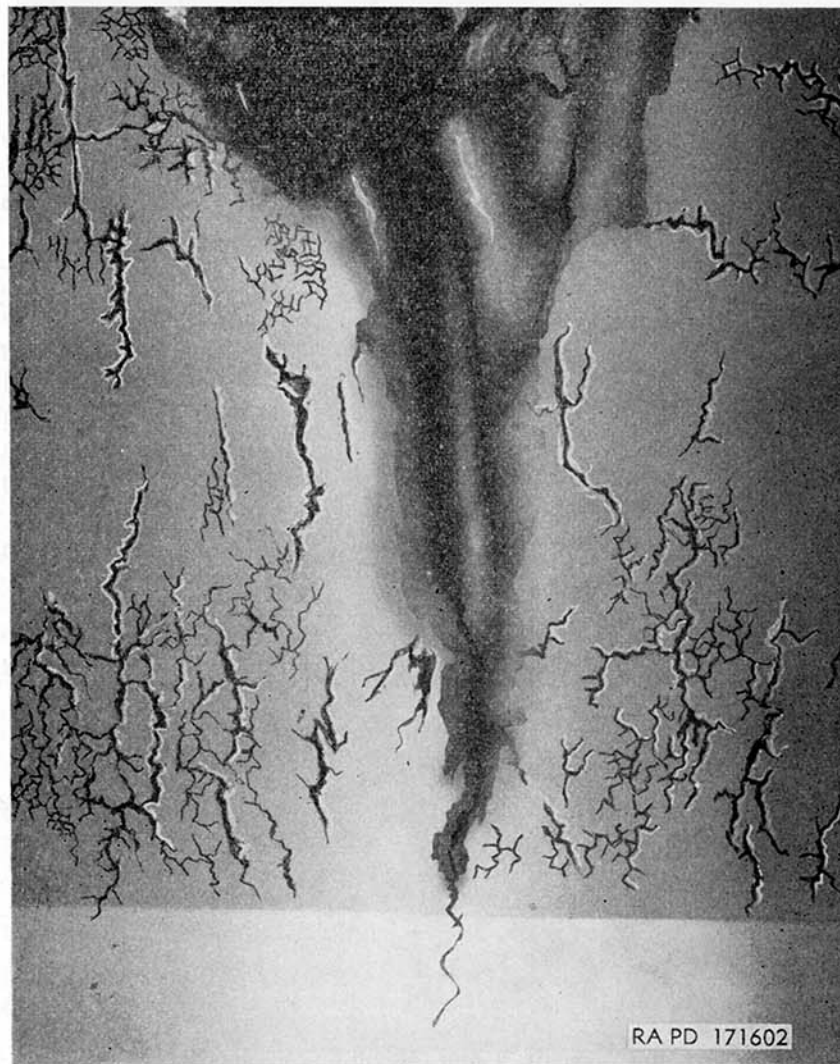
Section of liner at bullet seat, cal..50 machine gun, showing heavy erosion with deep cracks.
